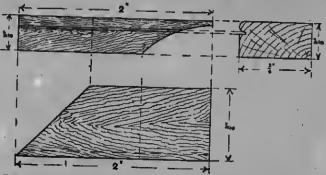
Pian, Elevation, and Section of Tray's Corner Feet.
